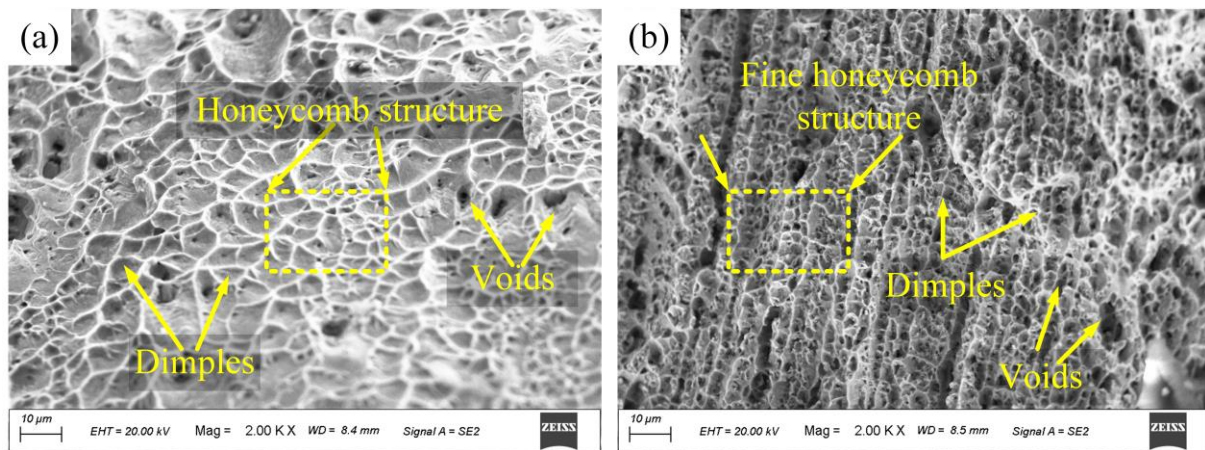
Fracture surface morphology of (a) as-welded Inconel 625 sample and (b) STWB
